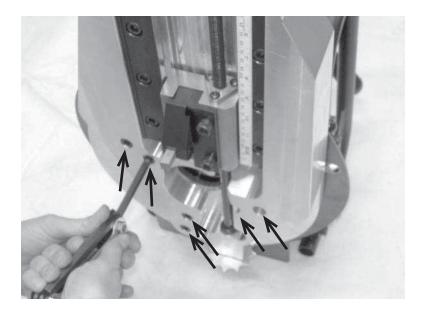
Tighten the captivated screws in the 6 holes to attach the single-point slide to the main shaft.
